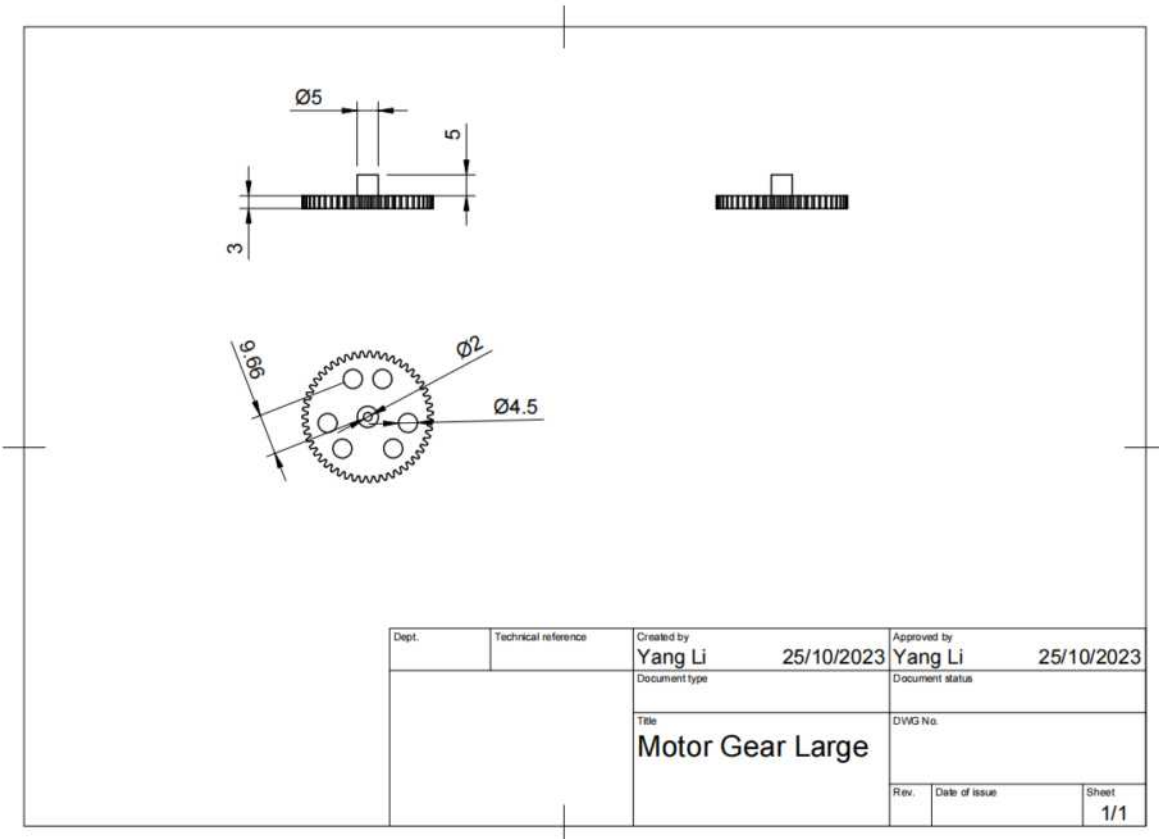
Driving wheel to be attached on motors for thrusting propeller.
